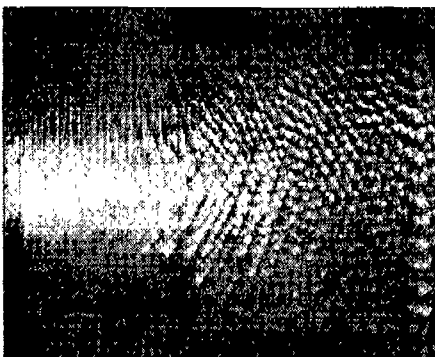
Chatter Mark of Workpiece (Cutting Speed:80 m/min, Feed Rate:0.1 mm/rev)
